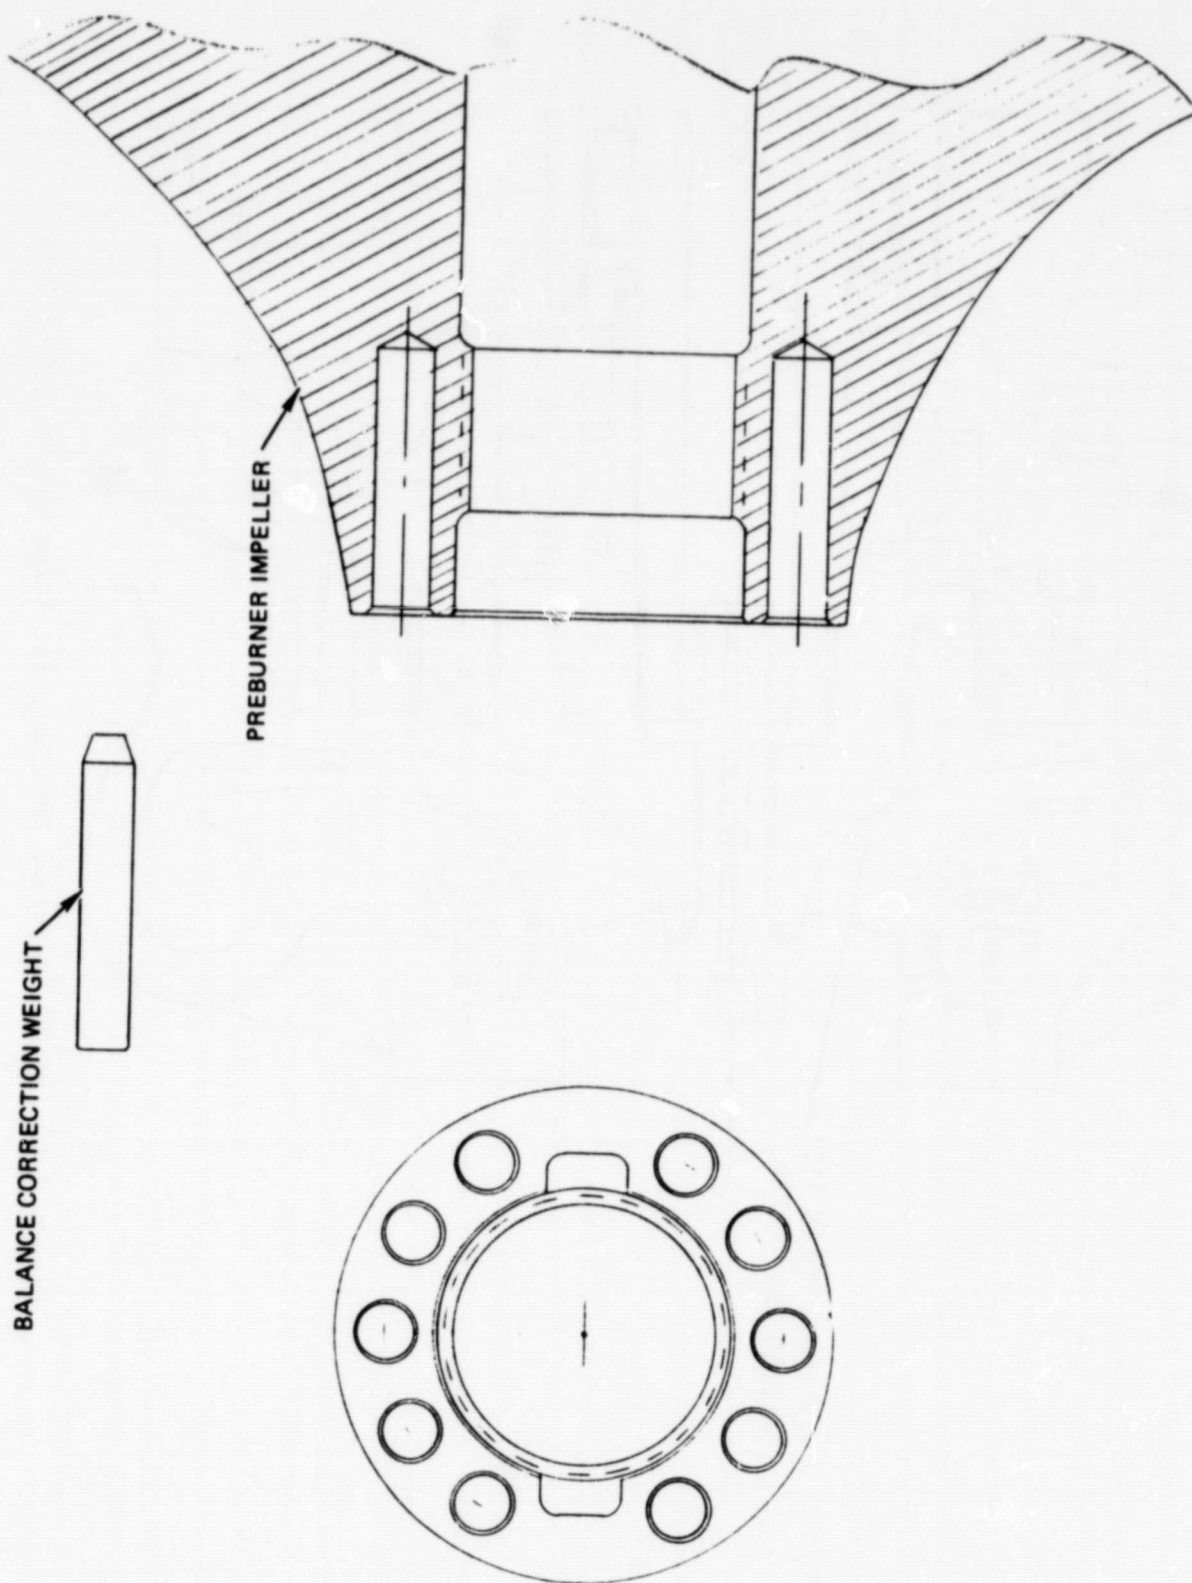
Preburner Impeller Exchangeable Weight Captured Pin
